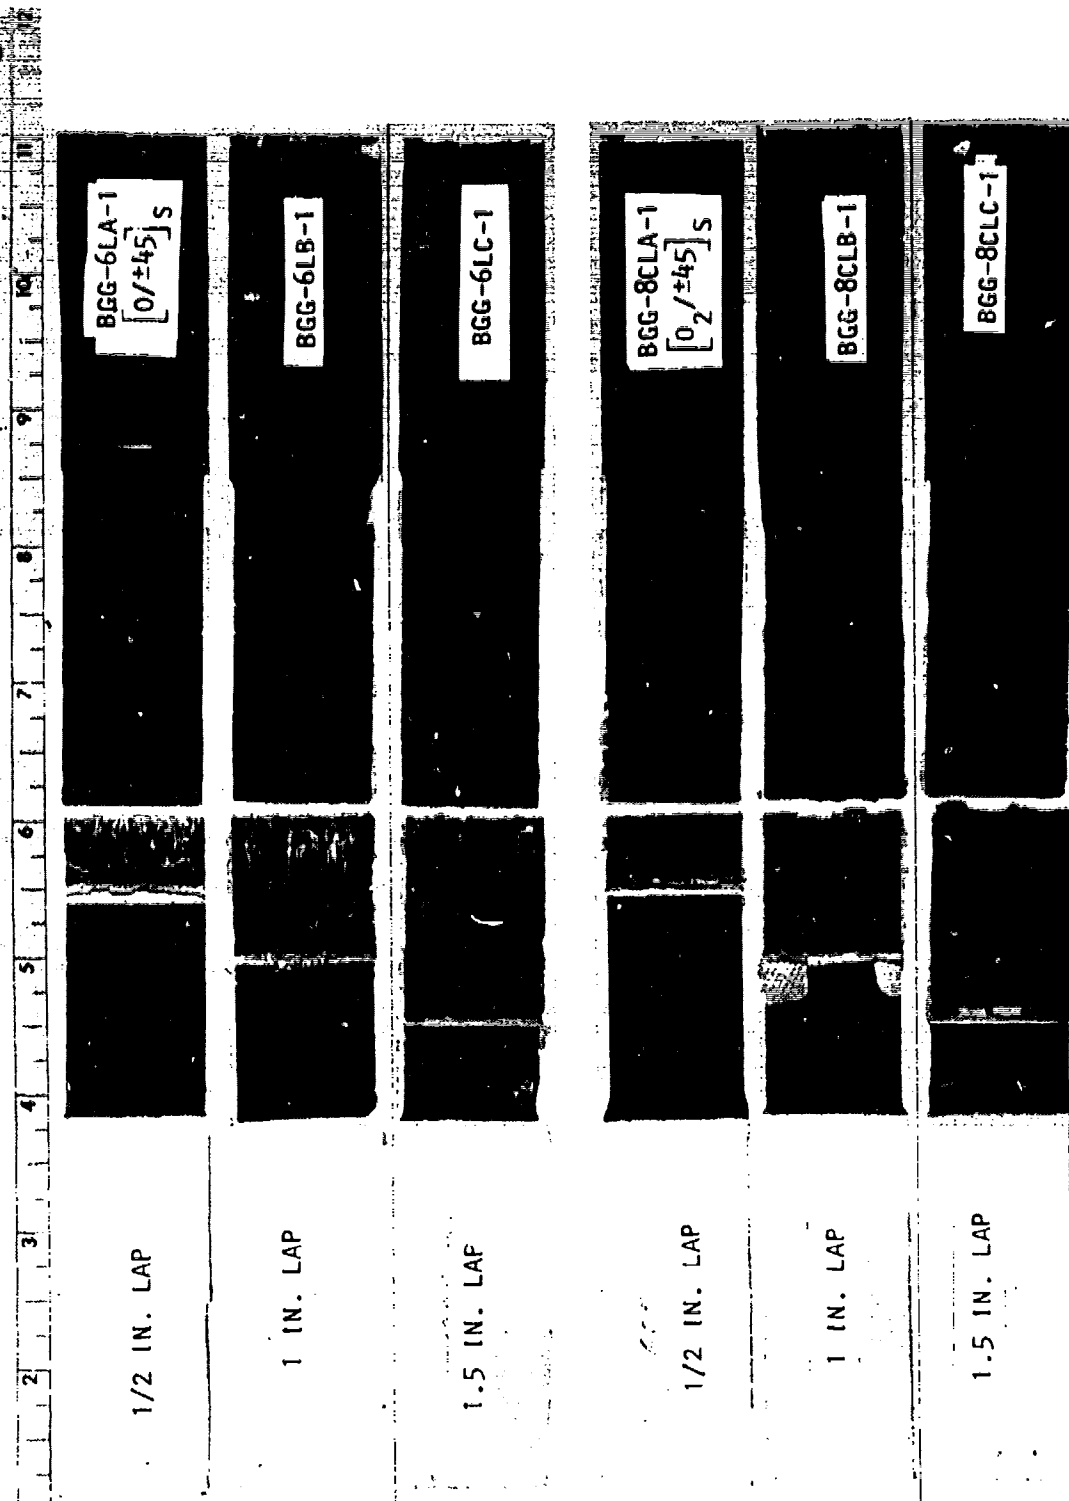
Typical Failed Bonded Single-Lap Joint Specimens - Metlbond 329-7 Adhesive, Graphite to Graphite Adherends, Type AS/3002 - Batch, Room Temperature
